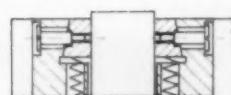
A double hold constructed on the lines of Fig. 17. This form of clamp exercises an equal pressure on both faces and is really only suitable for work where the side faces have already been finished machined
